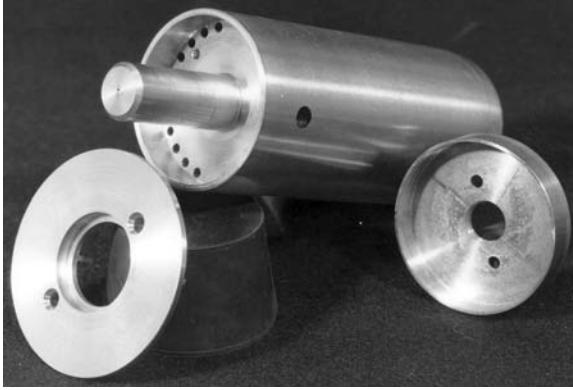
Inside top view of a 4-cm contactor rotor.
